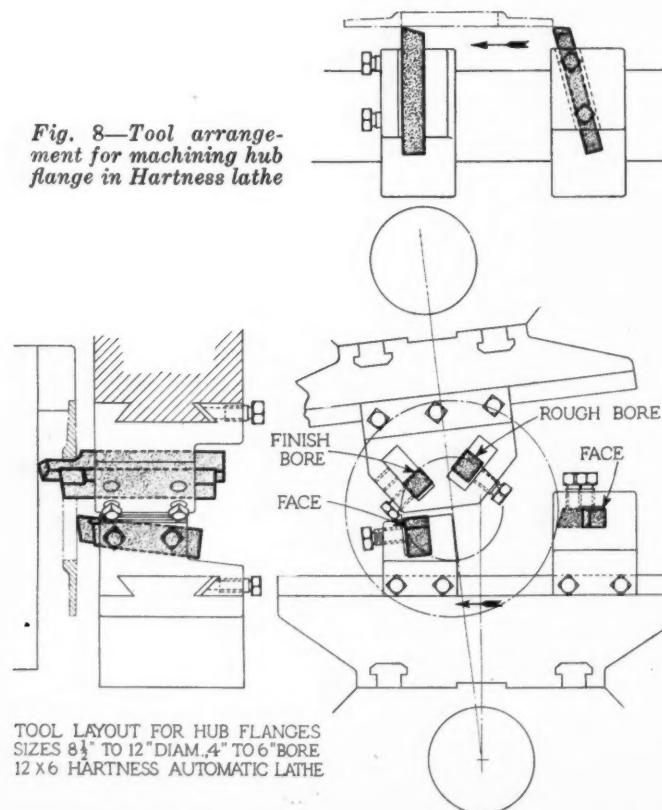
Tool arrangement for machining hub flange in Hartness lathe
